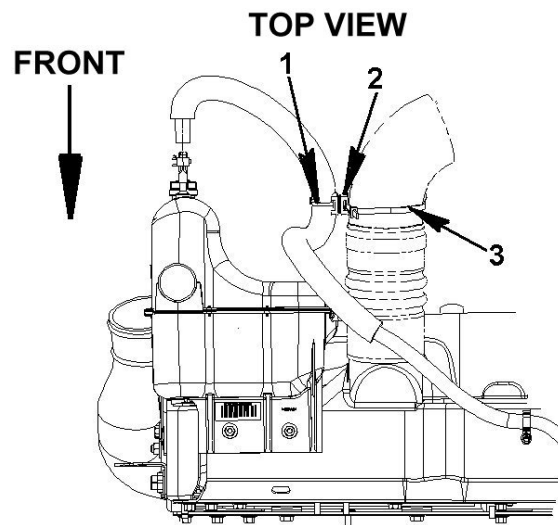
Cable Strap Hose to CAC Pipe (9900i Model Shown)
